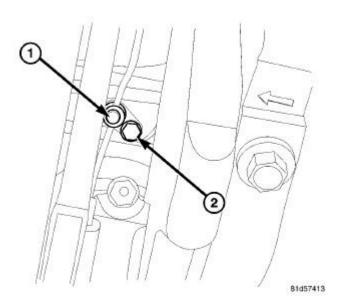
OIL JET REMOVE/INSTALL Courtesy of CHRYSLER LLC
